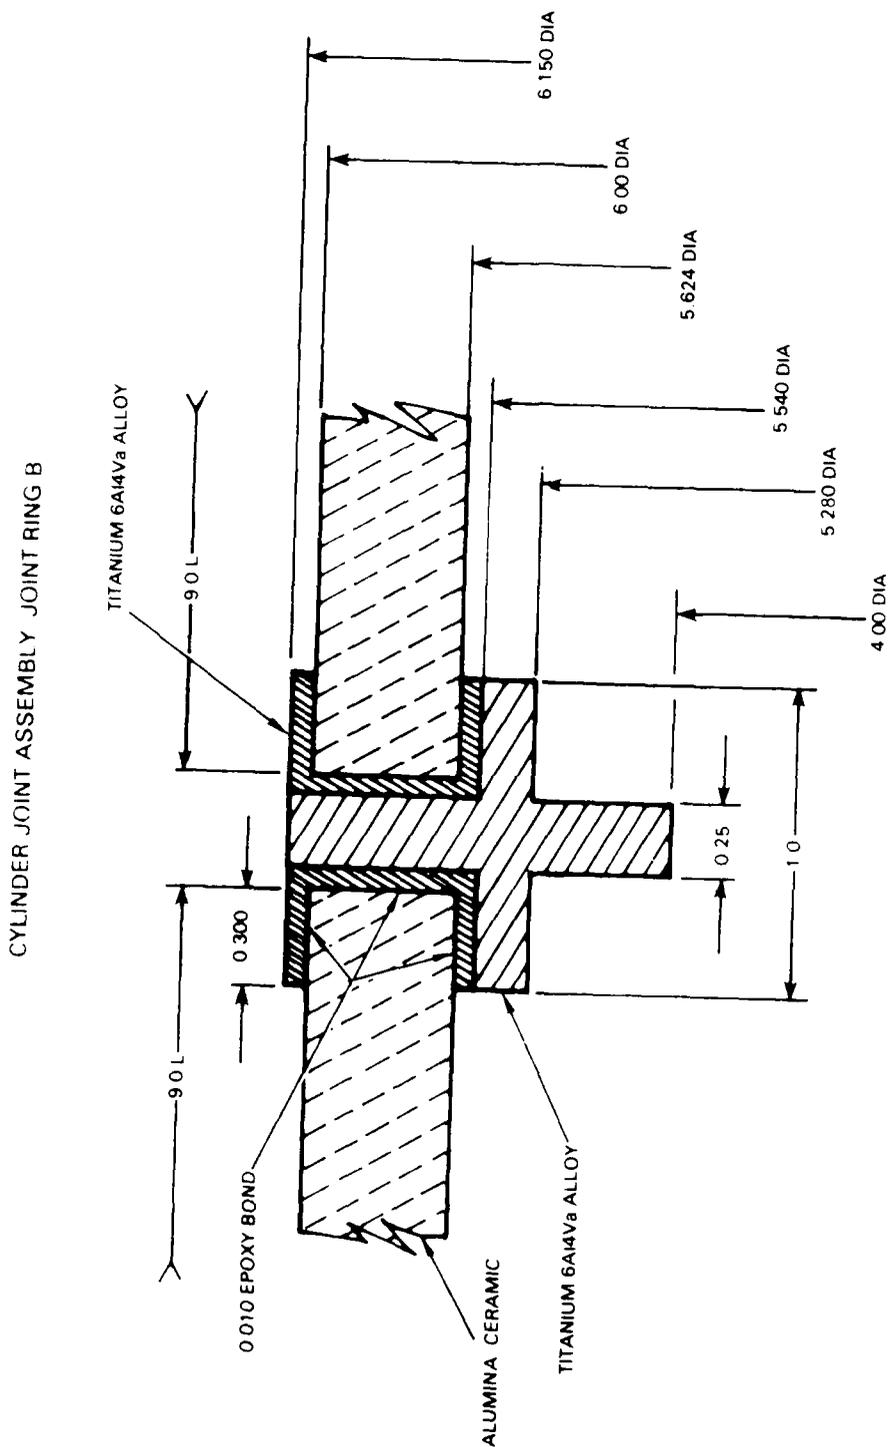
Two Model 1 cylinders joined by joint ring B. Joint ring B is calculated to fail under 10,500 psi external pressure when incorporated into a housing assembly made up of six, or more, Model 1 or Model 2 ceramic cylinders and Figure 21 end closures.
